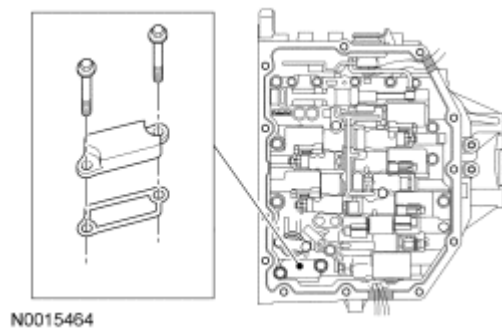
Identifying Suction Cover, Gasket & Bolts
